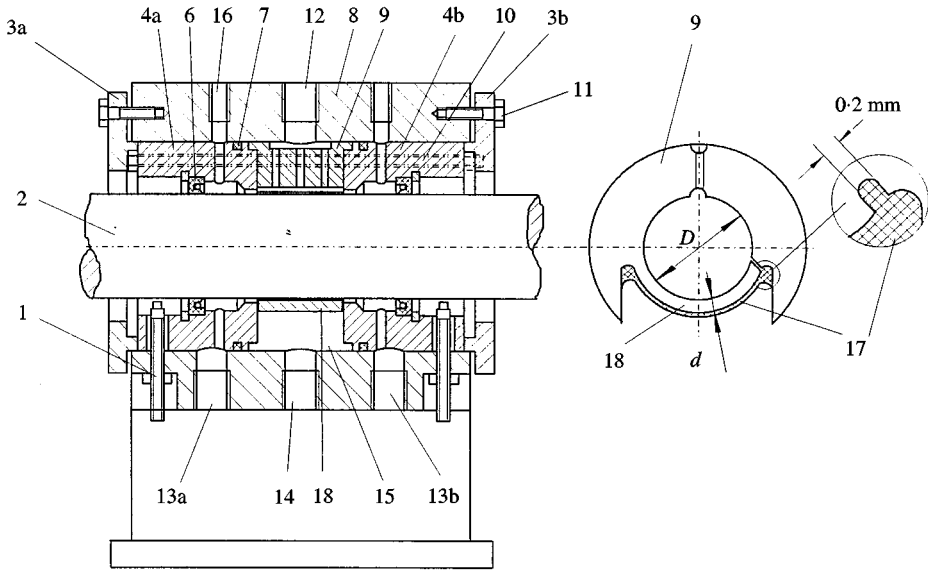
Assembly of the active bearing: 1-eddy current transducer; 2-journal; 3-flanges; 4-bearing bushes; 6-lip-seal; 7-“O” ring seal; 8-housing; 9-bearing bush; 10-bolt; 11-bolt; 12-lubricant inlet; 13-lubricant outlets; 14-chamber pressure input; 15-pressure chamber; 16-air channels; 17-flexible sealant; 18-flexible sleeve.
